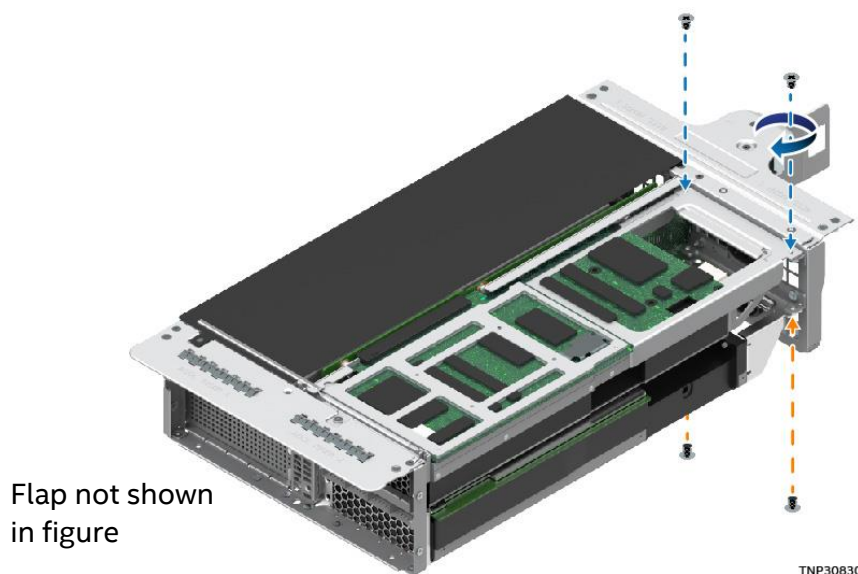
Securing the Accelerator Add-in Card in the Riser Assembly
